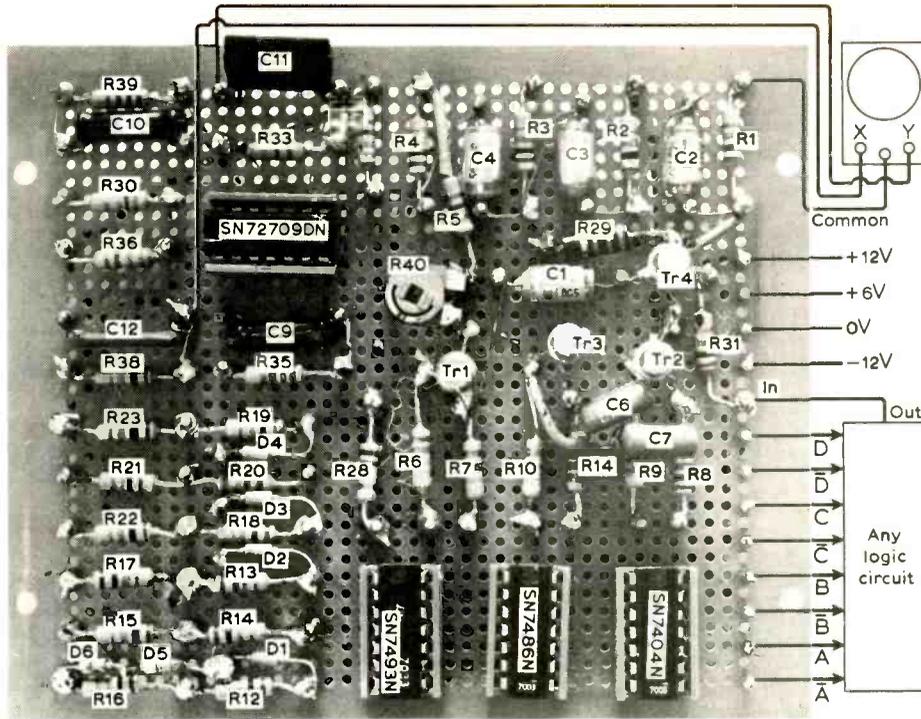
A photograph of the prototype showing component positions. It should be noted that some parts have been mounted on the reverse side of the board and are therefore not marked. The integrated circuits are plugged into dual-in-line sockets which makes for easy removal.
